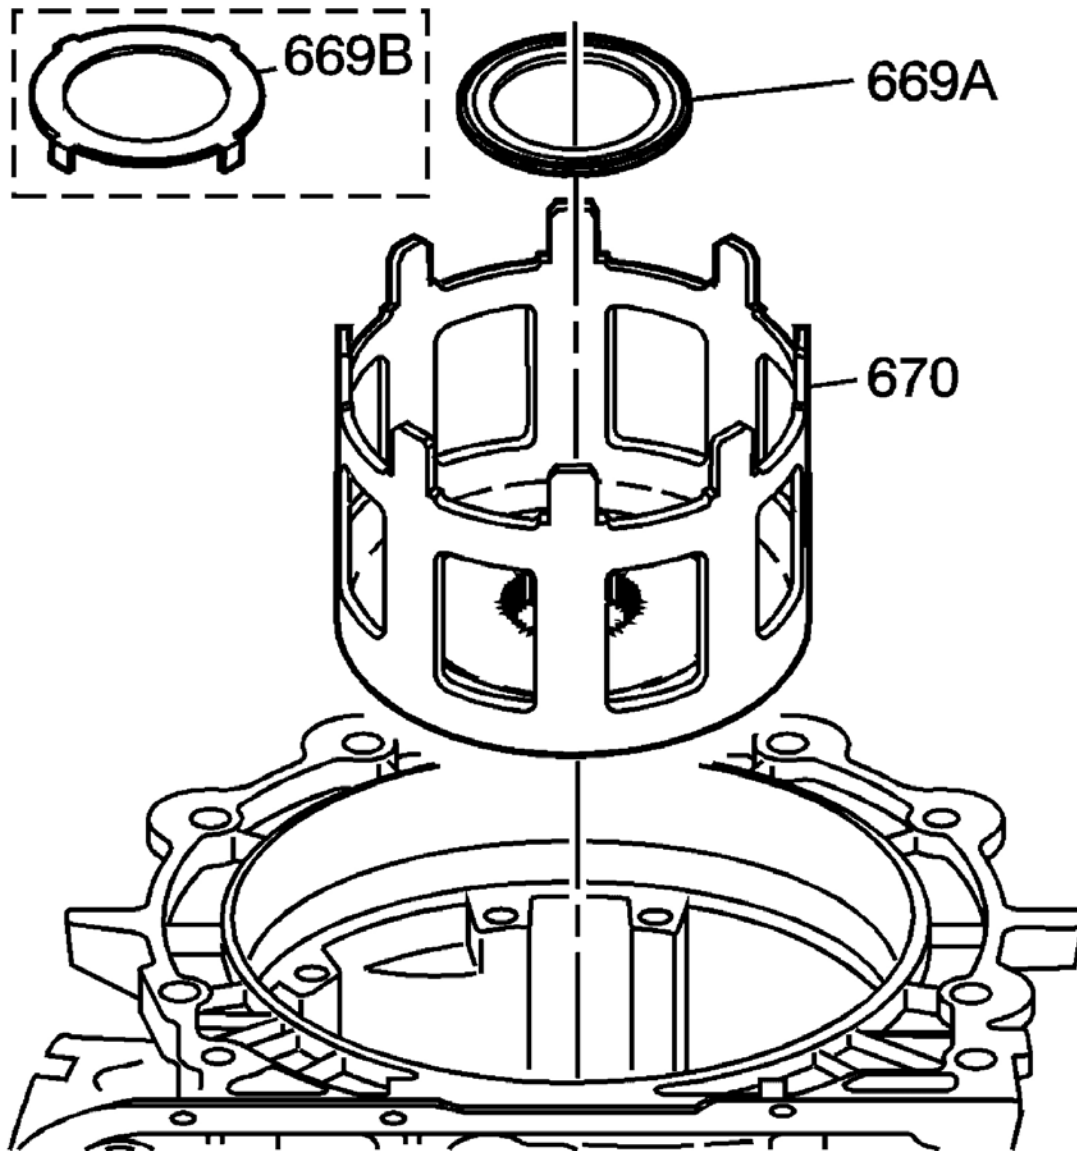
View Of Reaction Sun Shell & Thrust Washer
